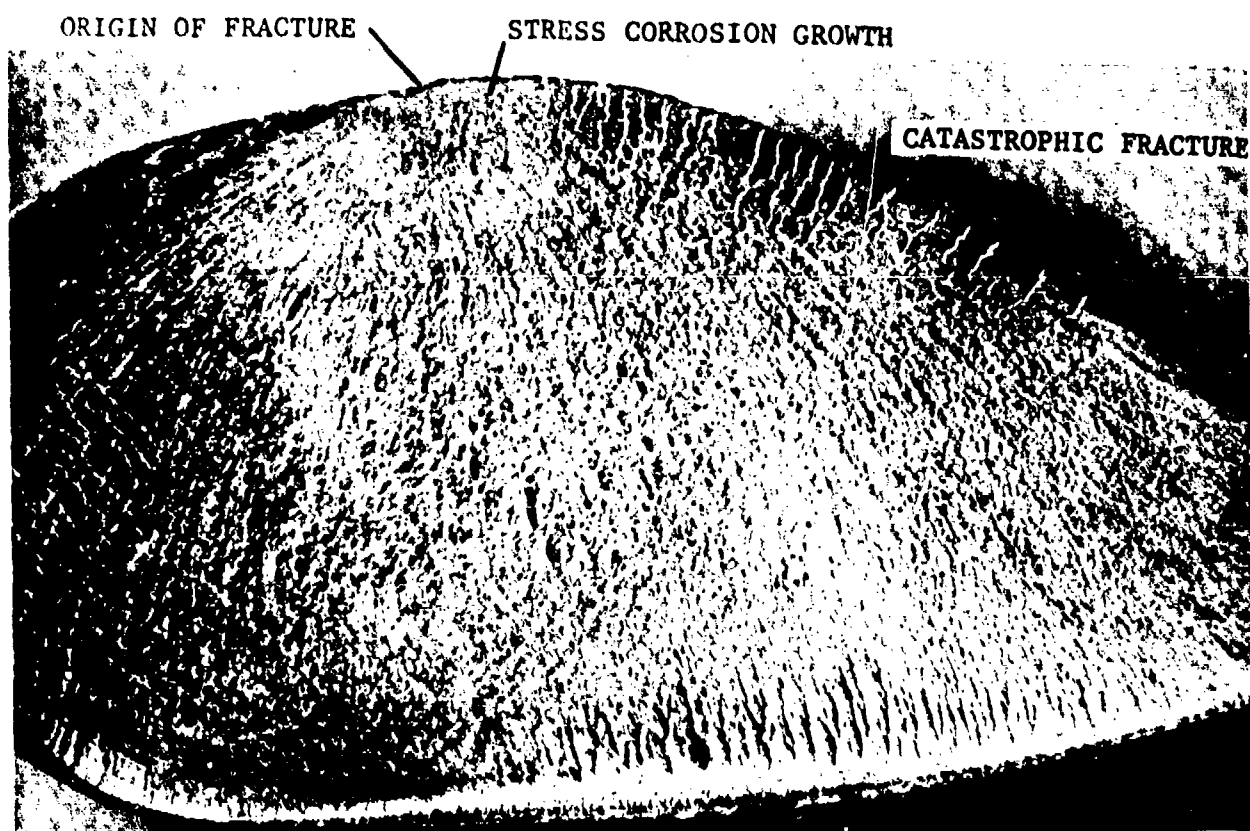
Fracture surface of spring No. 21 as photographed under fluorescent light, with wet magnetic particles sprayed on the surface to enhance ridges.
